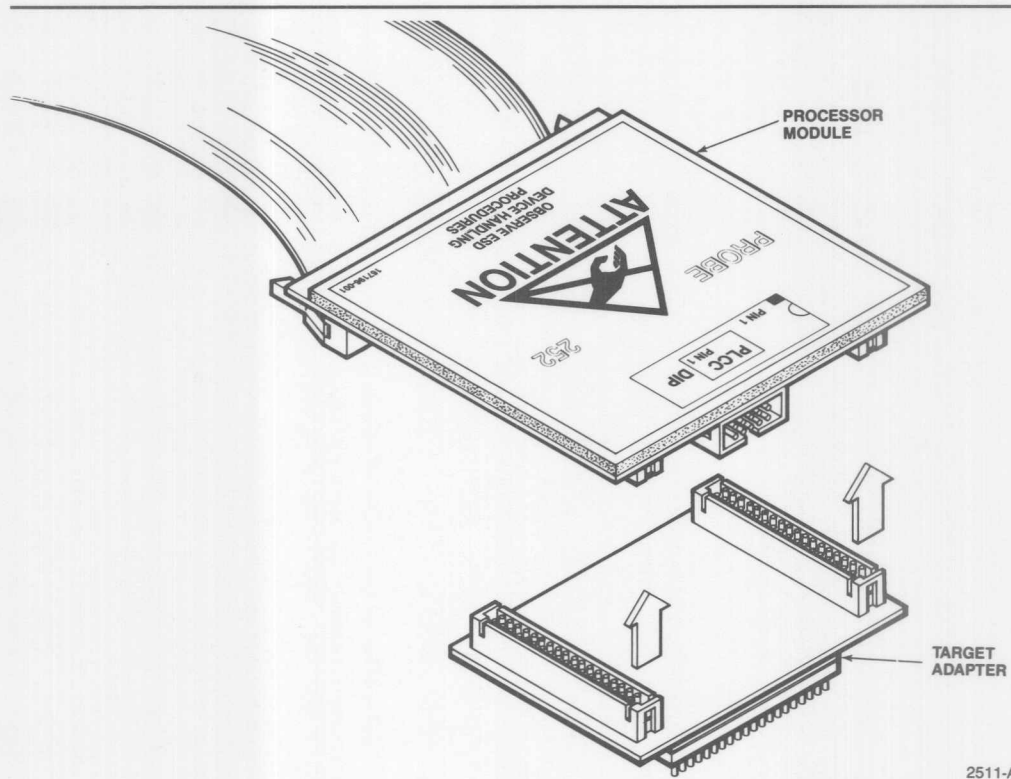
Connecting the Target Adaptor to the Processor Module
